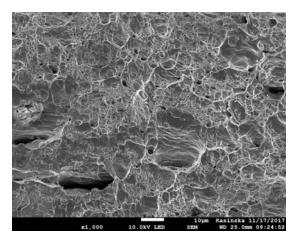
Fracture surface close to point C along line AC in Fig. 5
